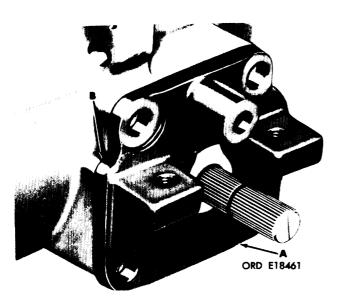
Removing operating shaft bearing and associated parts (all pumps except code A).
